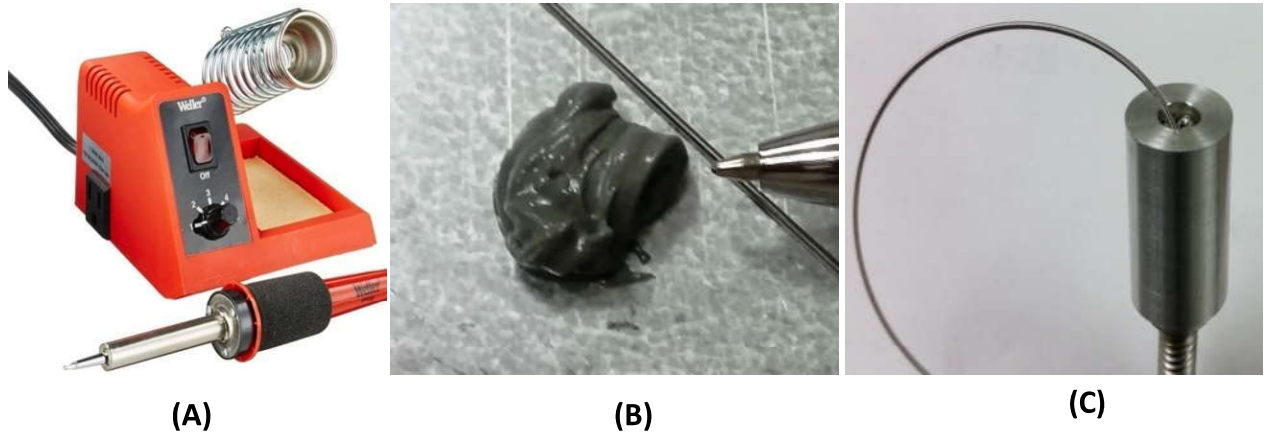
Soldering using A) common soldering tool, B) solder paste, and C) bath of solder for improving wettability.
